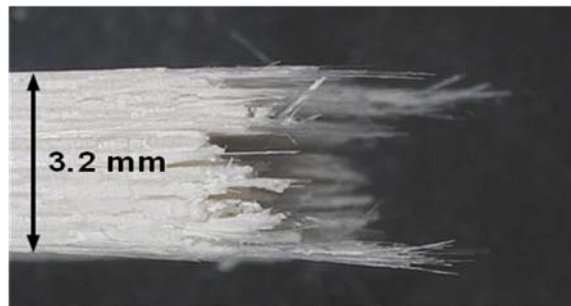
Fracture surface of the N720/AM specimen tested in tension to failure with constant loading rate of 0.0025MPa at 1100°C in steam (side view).
